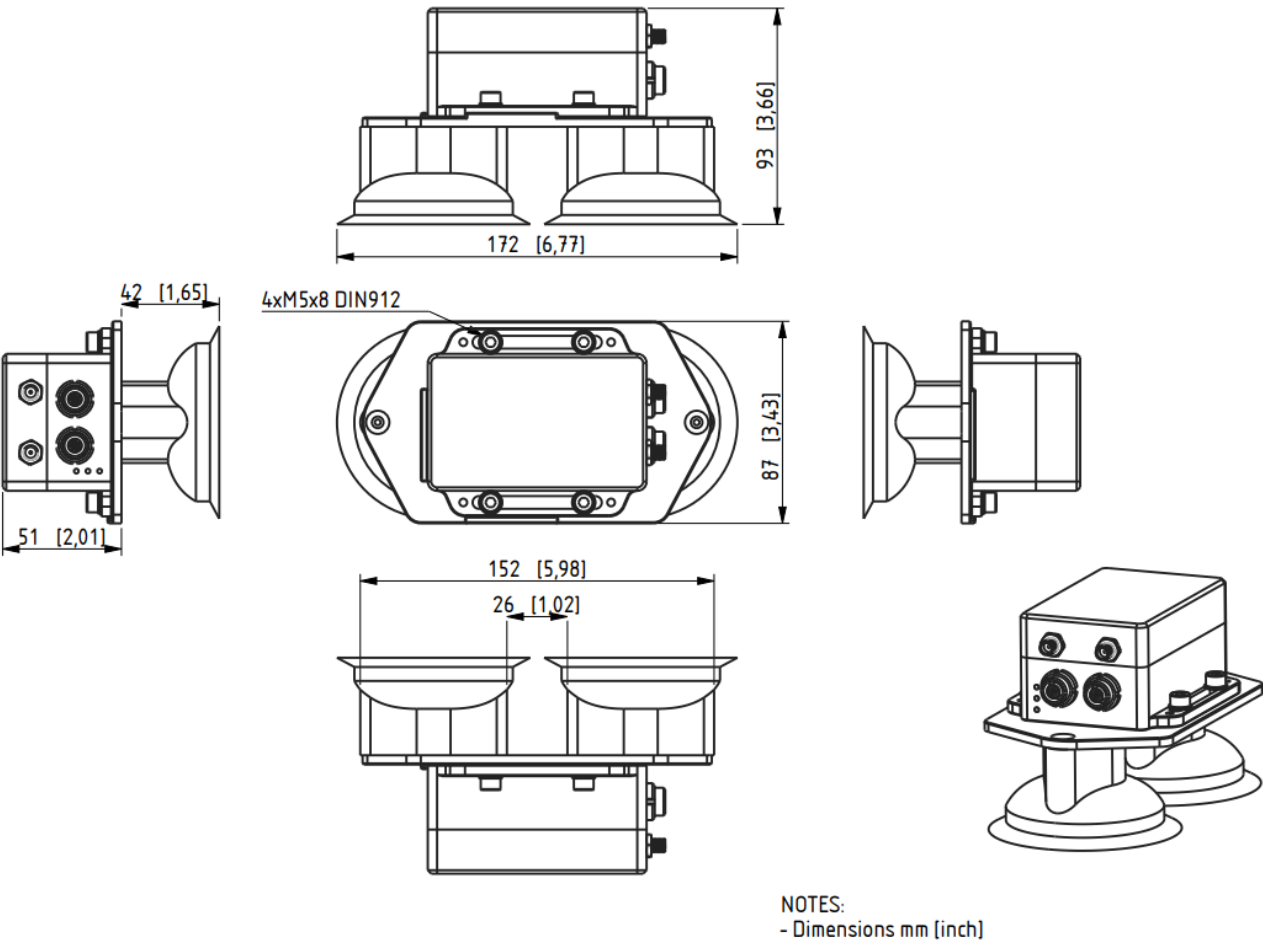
Drawing of NAVION i2 instrument suction cups mounting
